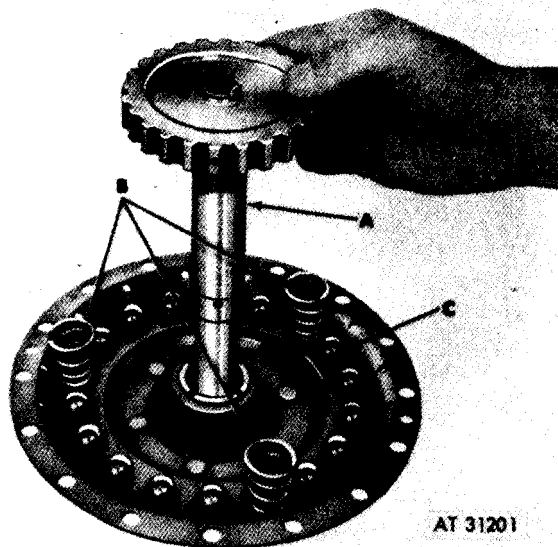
Removing or installing clutch discs from fan drive hub (mechanical clutch).
